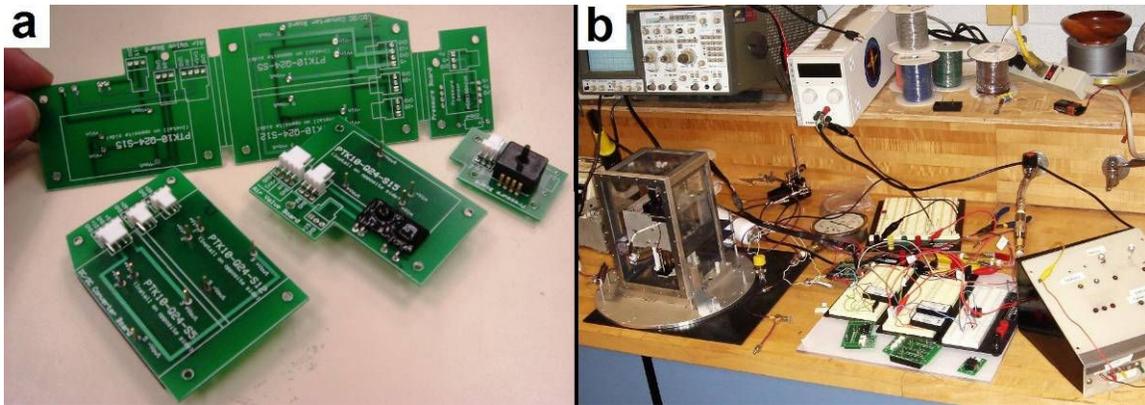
(a) PCBs fully assembled with original circuit board in background. (b) Circuit boards in front of PCB validation setup.
